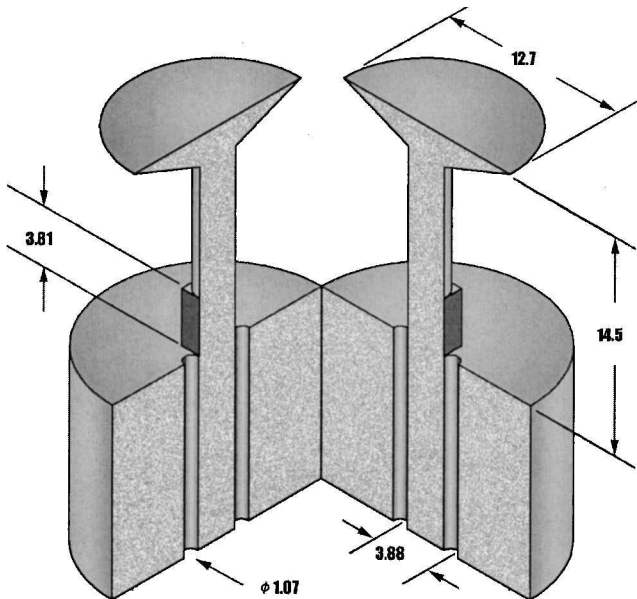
Schematic of flexure piece for rubber sheet skin-friction gauge (all dimensions in millimeters).
